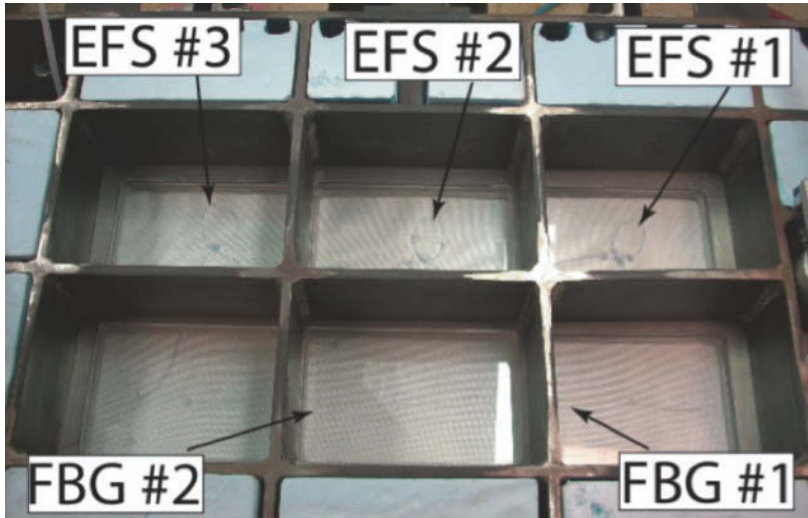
Sensors positioned in RTM prior to injection (mold closed)
